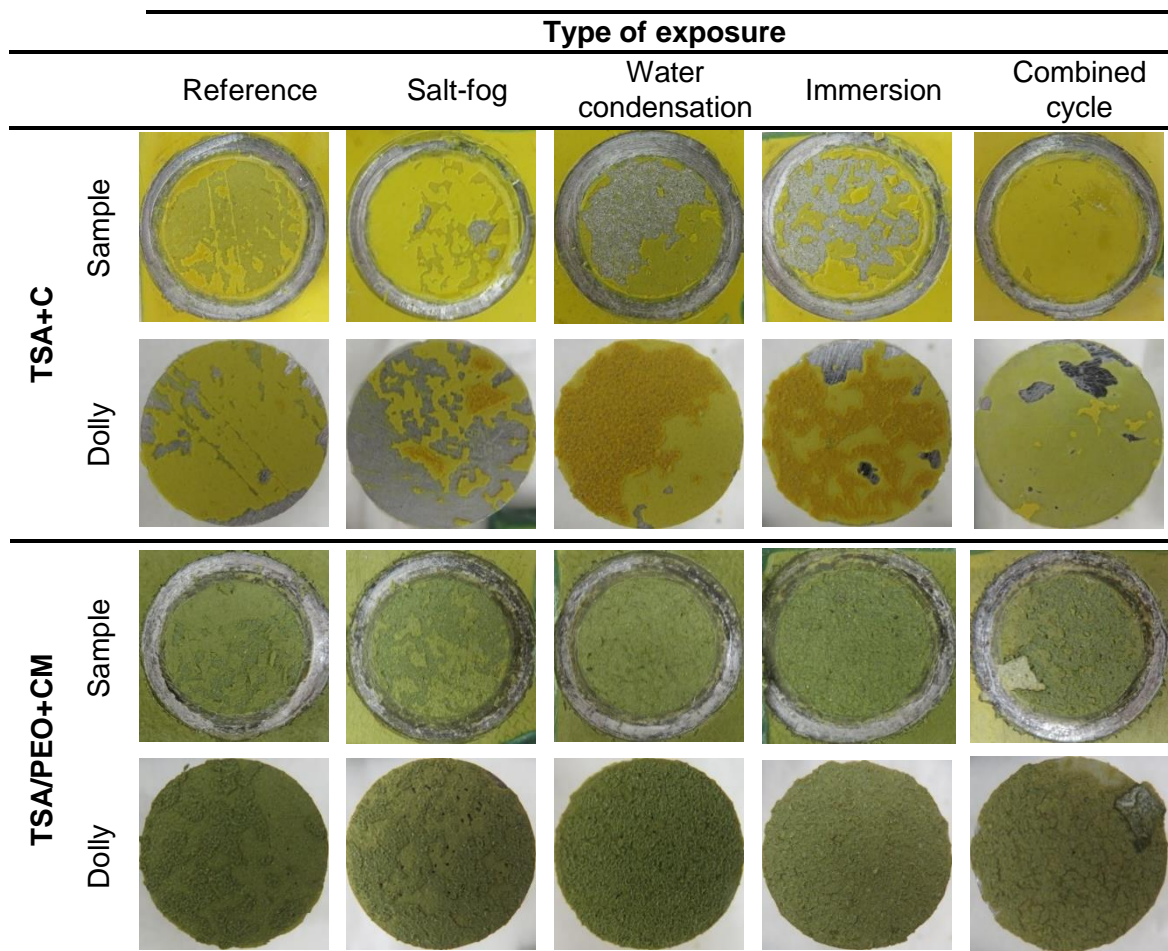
Fracture surface of the two coating systems after weathering aging tests in different atmospheric conditions
